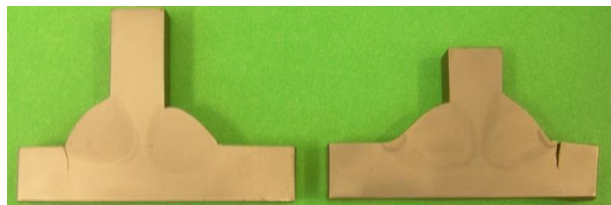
Two fillet welded connections: as-welded connection on the left, TIG-dressed on the right
